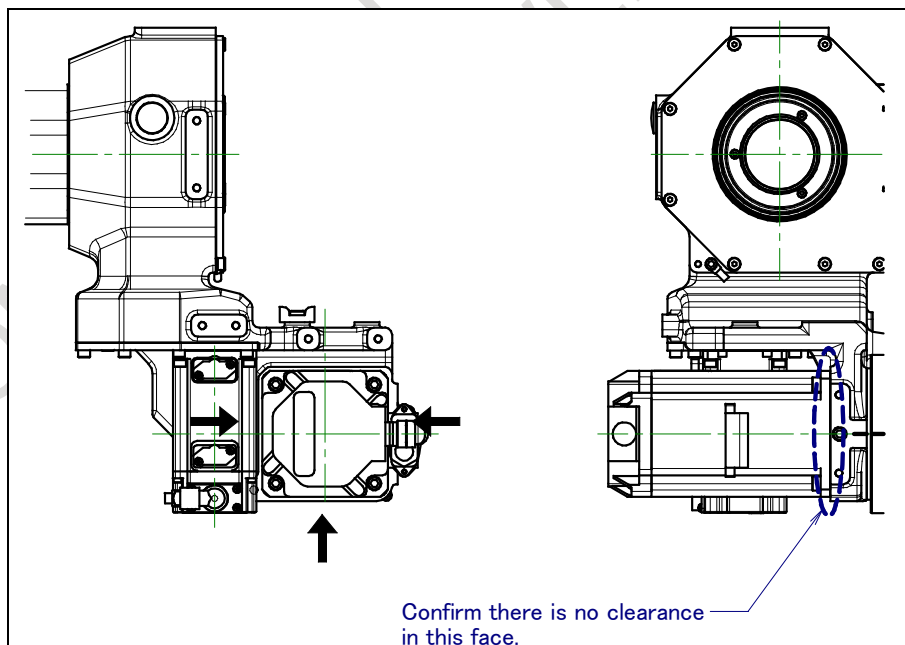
(e) Confirming the mounting of J3-axis motor
